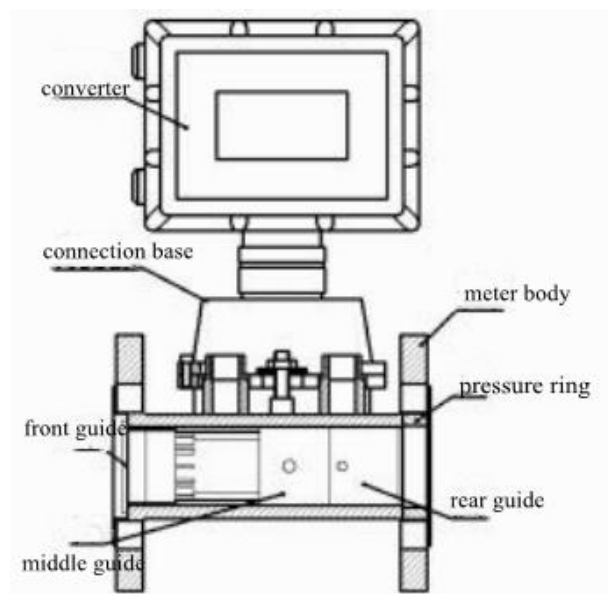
Flange connection type turbine flowmeter structure drawing
